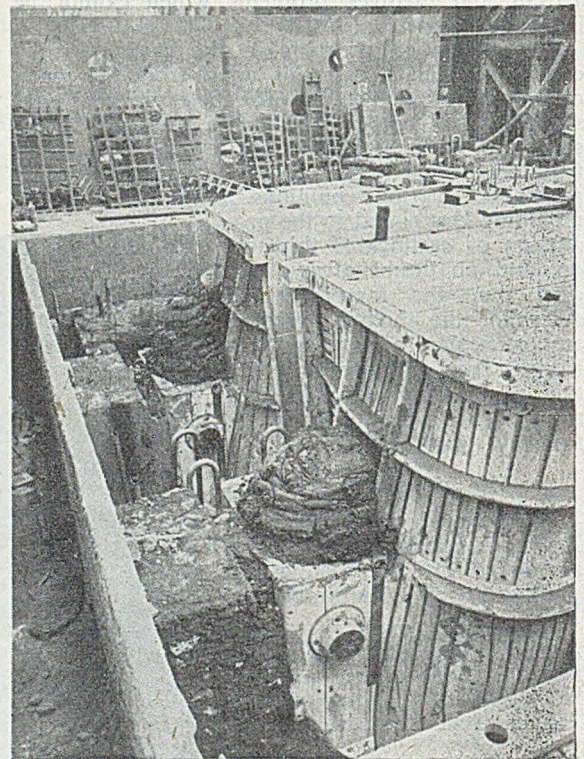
Pattern Equipment for Cylinder Exhaust Sections. Moulded Two Side-by-side in the Same Pit.
